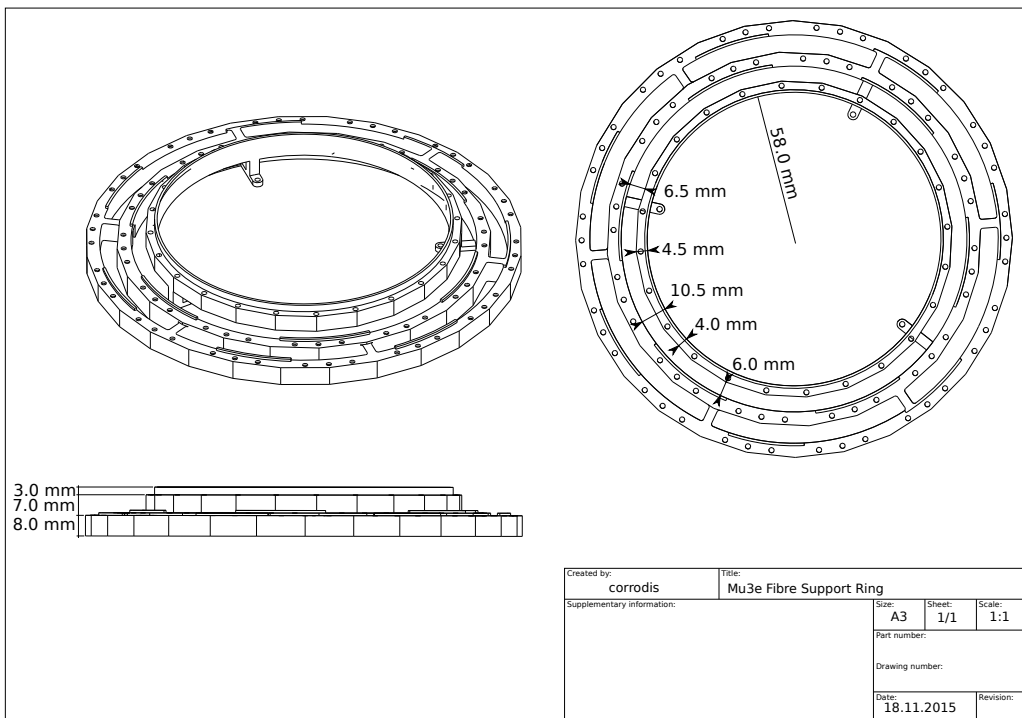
Drawing of the experiment support ring on which the fibre modules are mounted.
